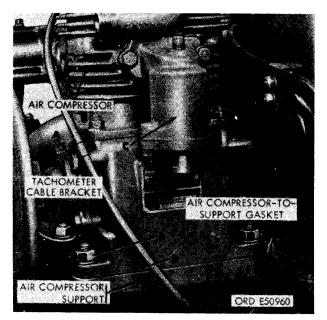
REMOVING OR INSTALLING AIR COMPRESSOR ASSEMBLY.
